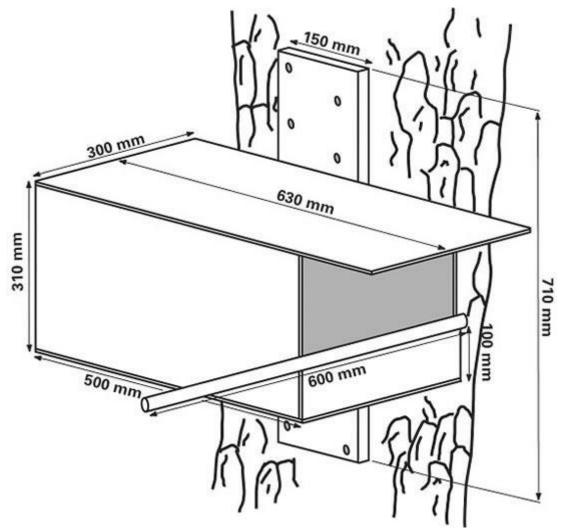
The design and dimensions of a Kestrel nest box (RSPB Design)
